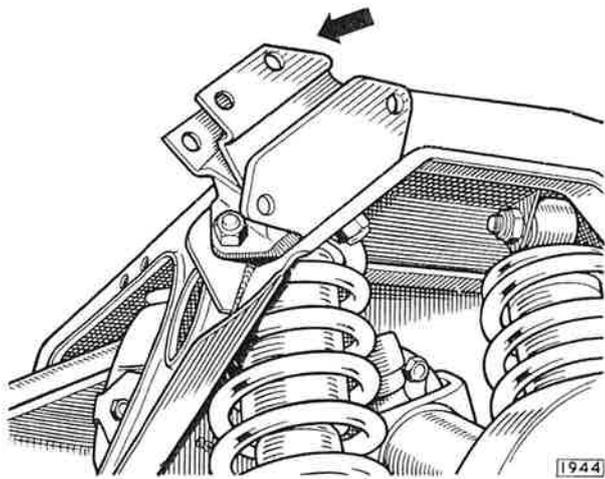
Showing the correct position of the rear suspension mounting rubber
